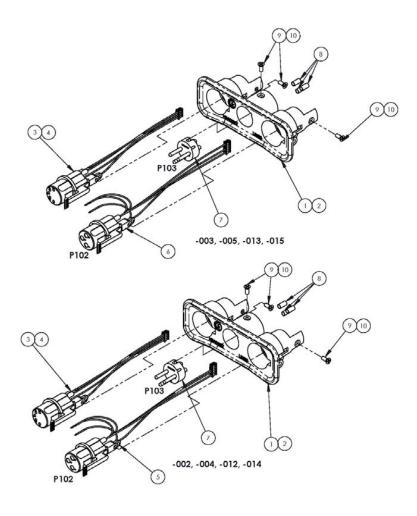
Connector Plate Assembly, BP319 - 90207486000
